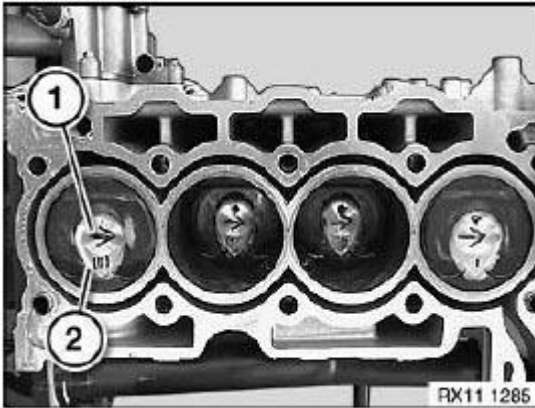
Identifying Camshaft Drive Direction And Cylinder Allocation
